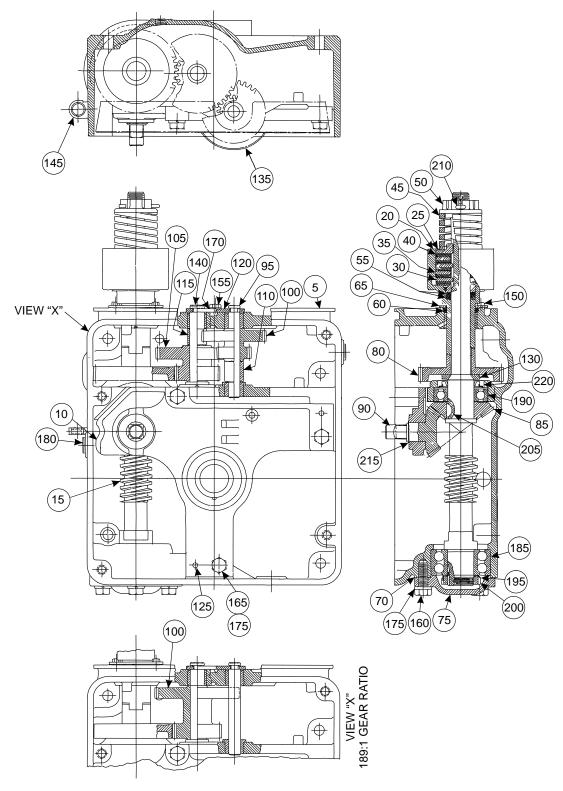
M-3 IPD Switch Machine Gearbox
